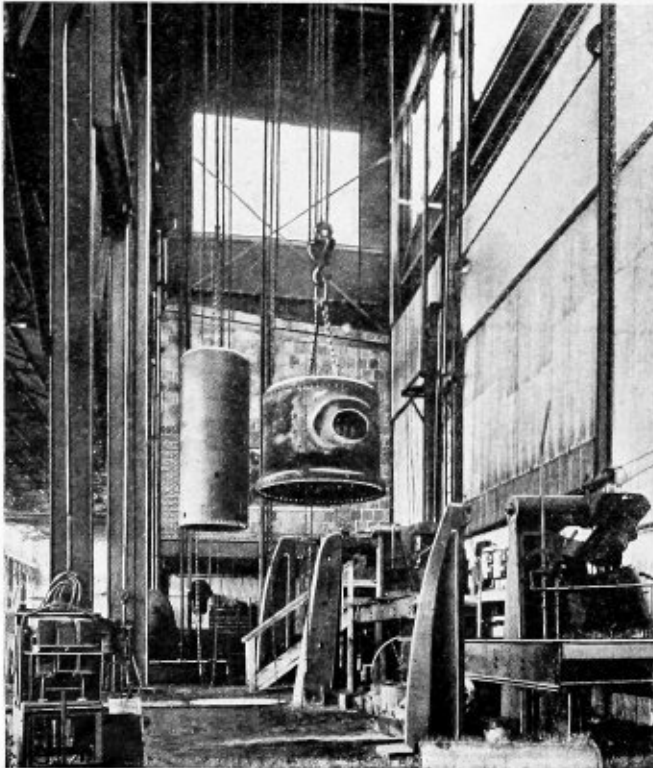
Riveting Tower. Cranes Have 50-Foot Clear Lift
